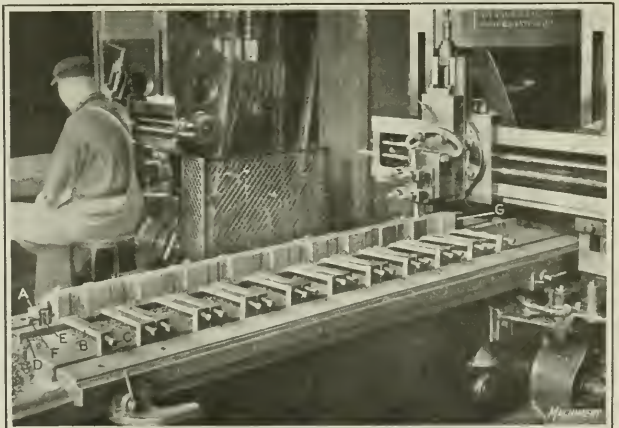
Four-spindle Gang Drilling Machine used for machining Forged Clutch Levers
